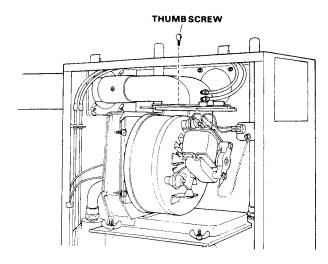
LOCATION OF PRESSURE SENSING TUBES
